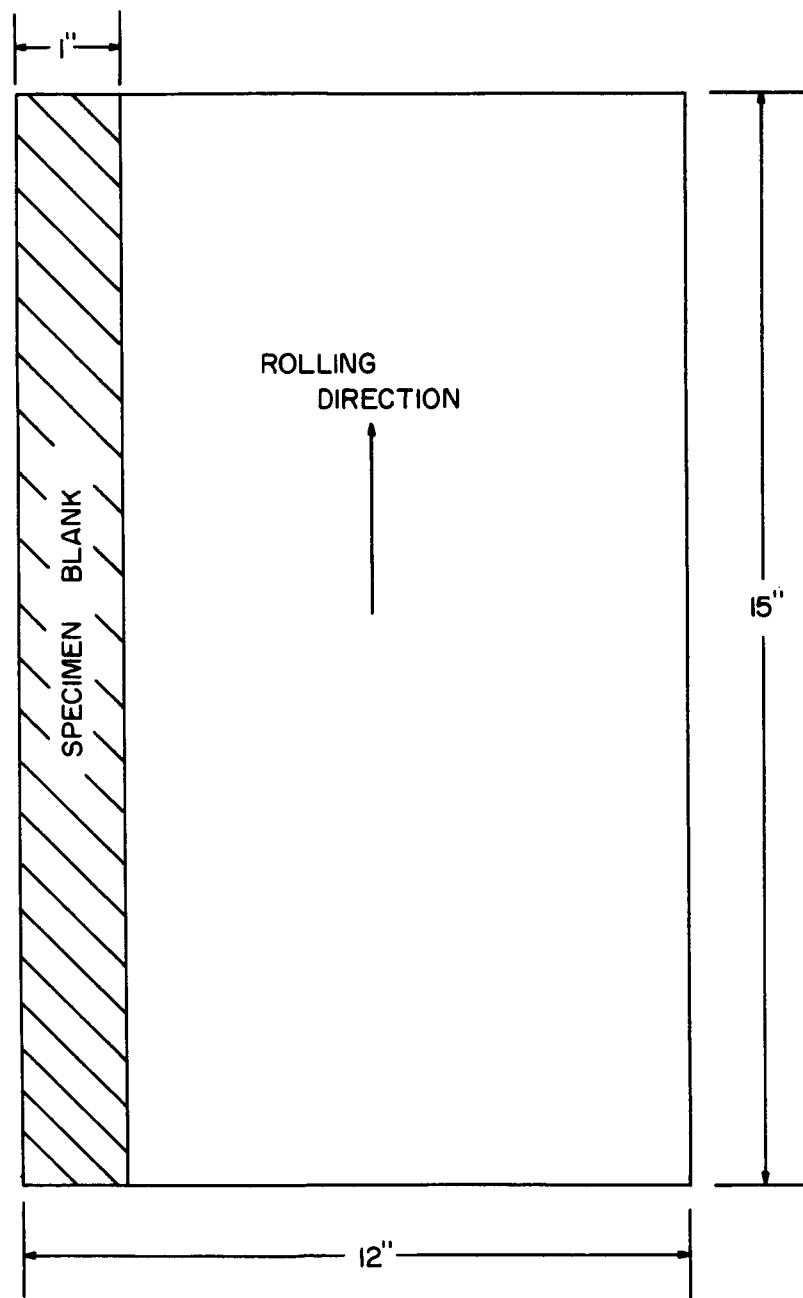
LOCATION OF SPECIMEN ON SHEET STOCK.
